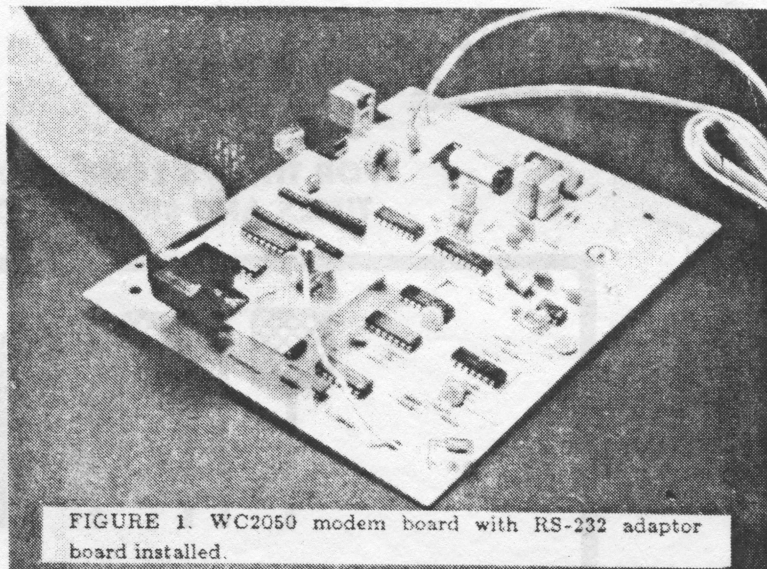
WC2050 modem board with RS-232 adaptor board installed.
